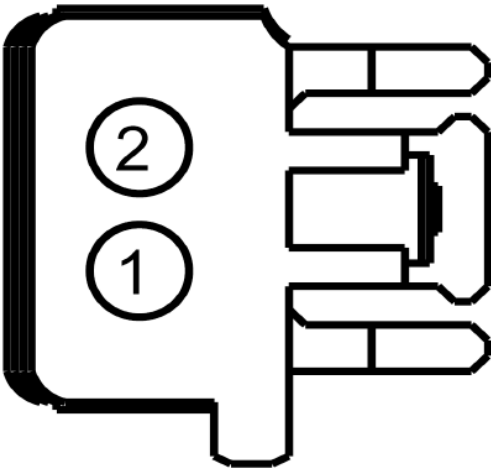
Passenger Side Door Lock Switch Connector End View (C605)
